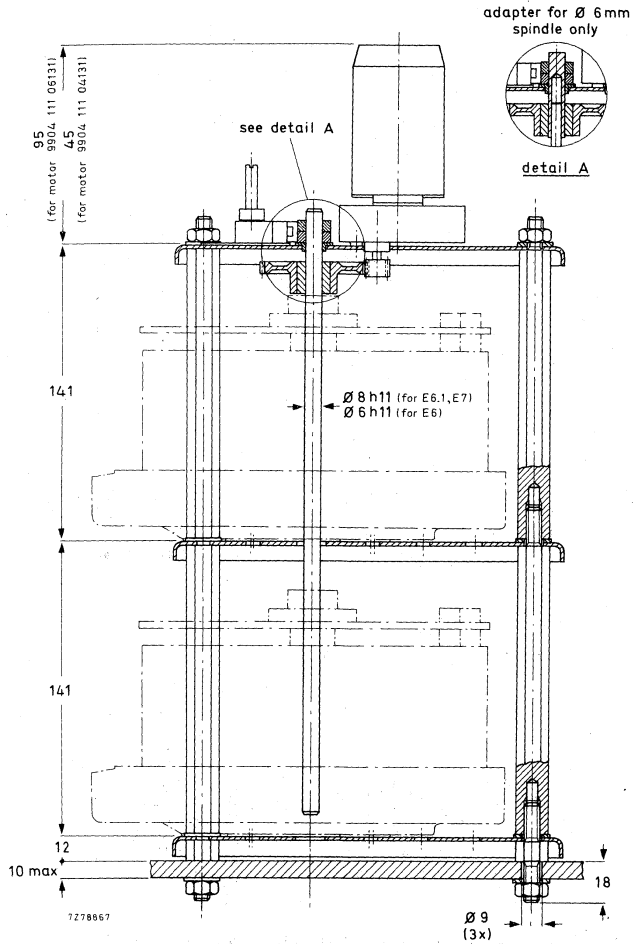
Motor drive for two ganged transformers with size code E6, E6.1 and E7.
